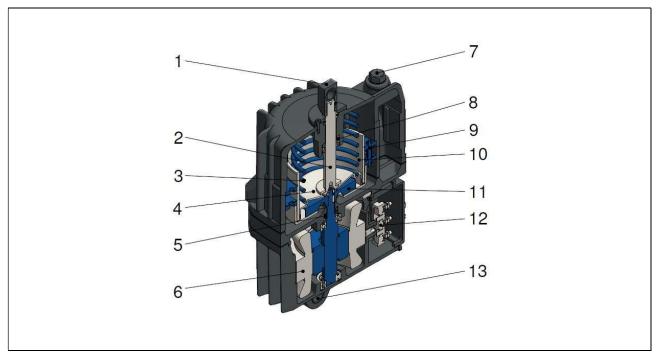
ELDRO[®] thruster layout (example: Ed 23/5 C-HS)
